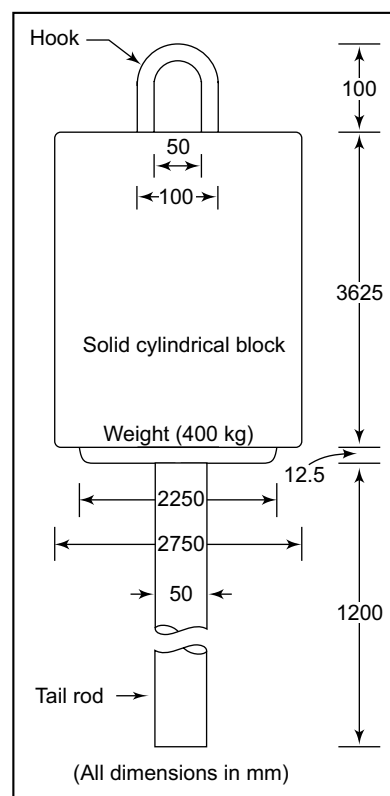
Drop-hammer for driving in the casing pipe in cable tool drilling
